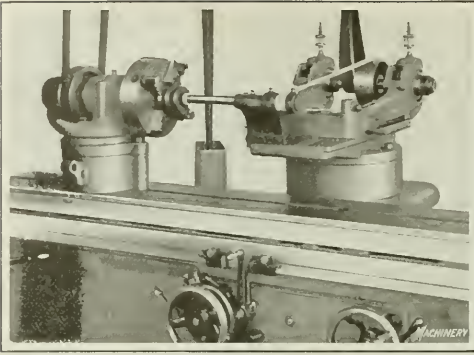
Internal Grinding made Possible by substituting an Attachment for the Wheel-spindle and its Boxes
